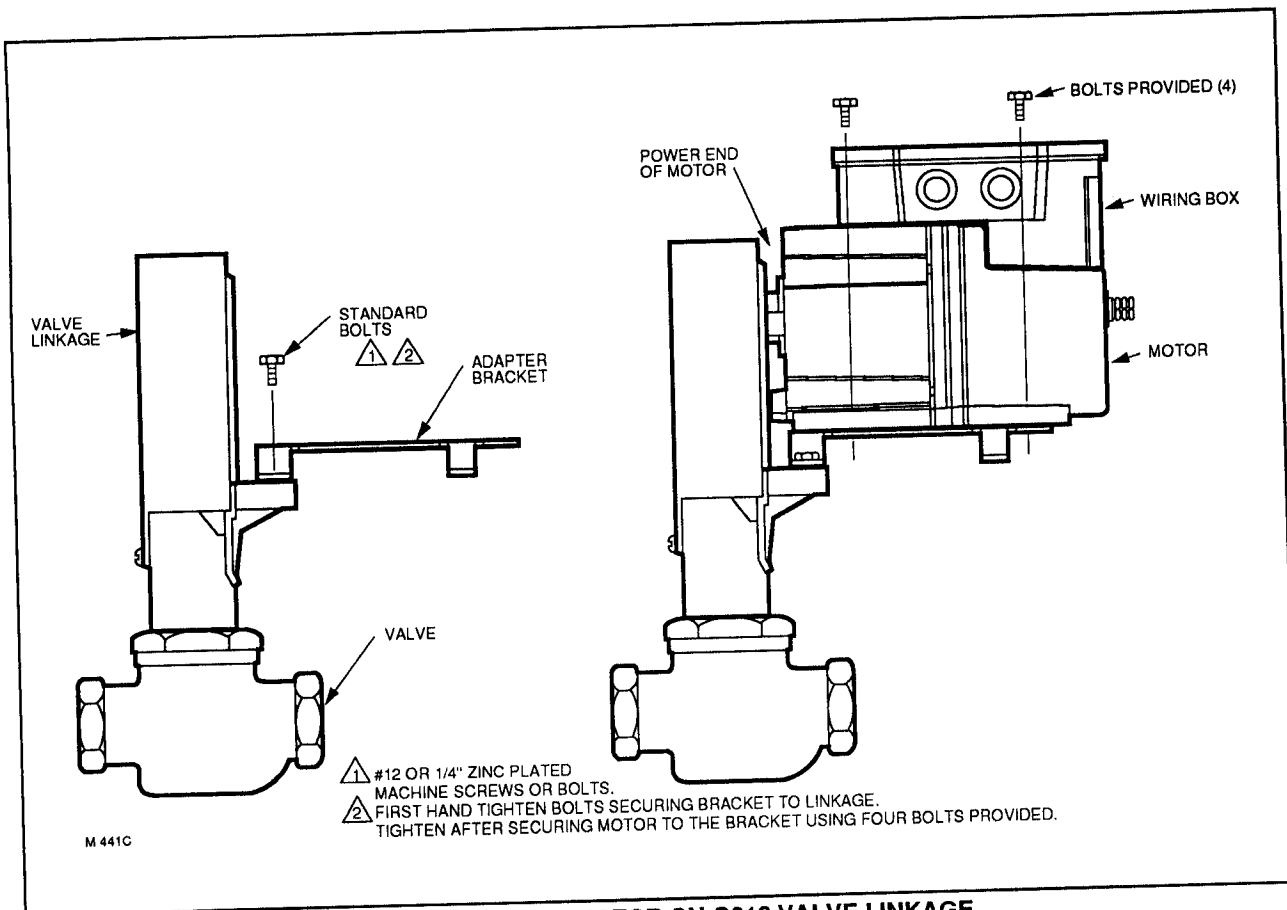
MOUNTING MOTOR ON Q618 VALVE LINKAGE.
